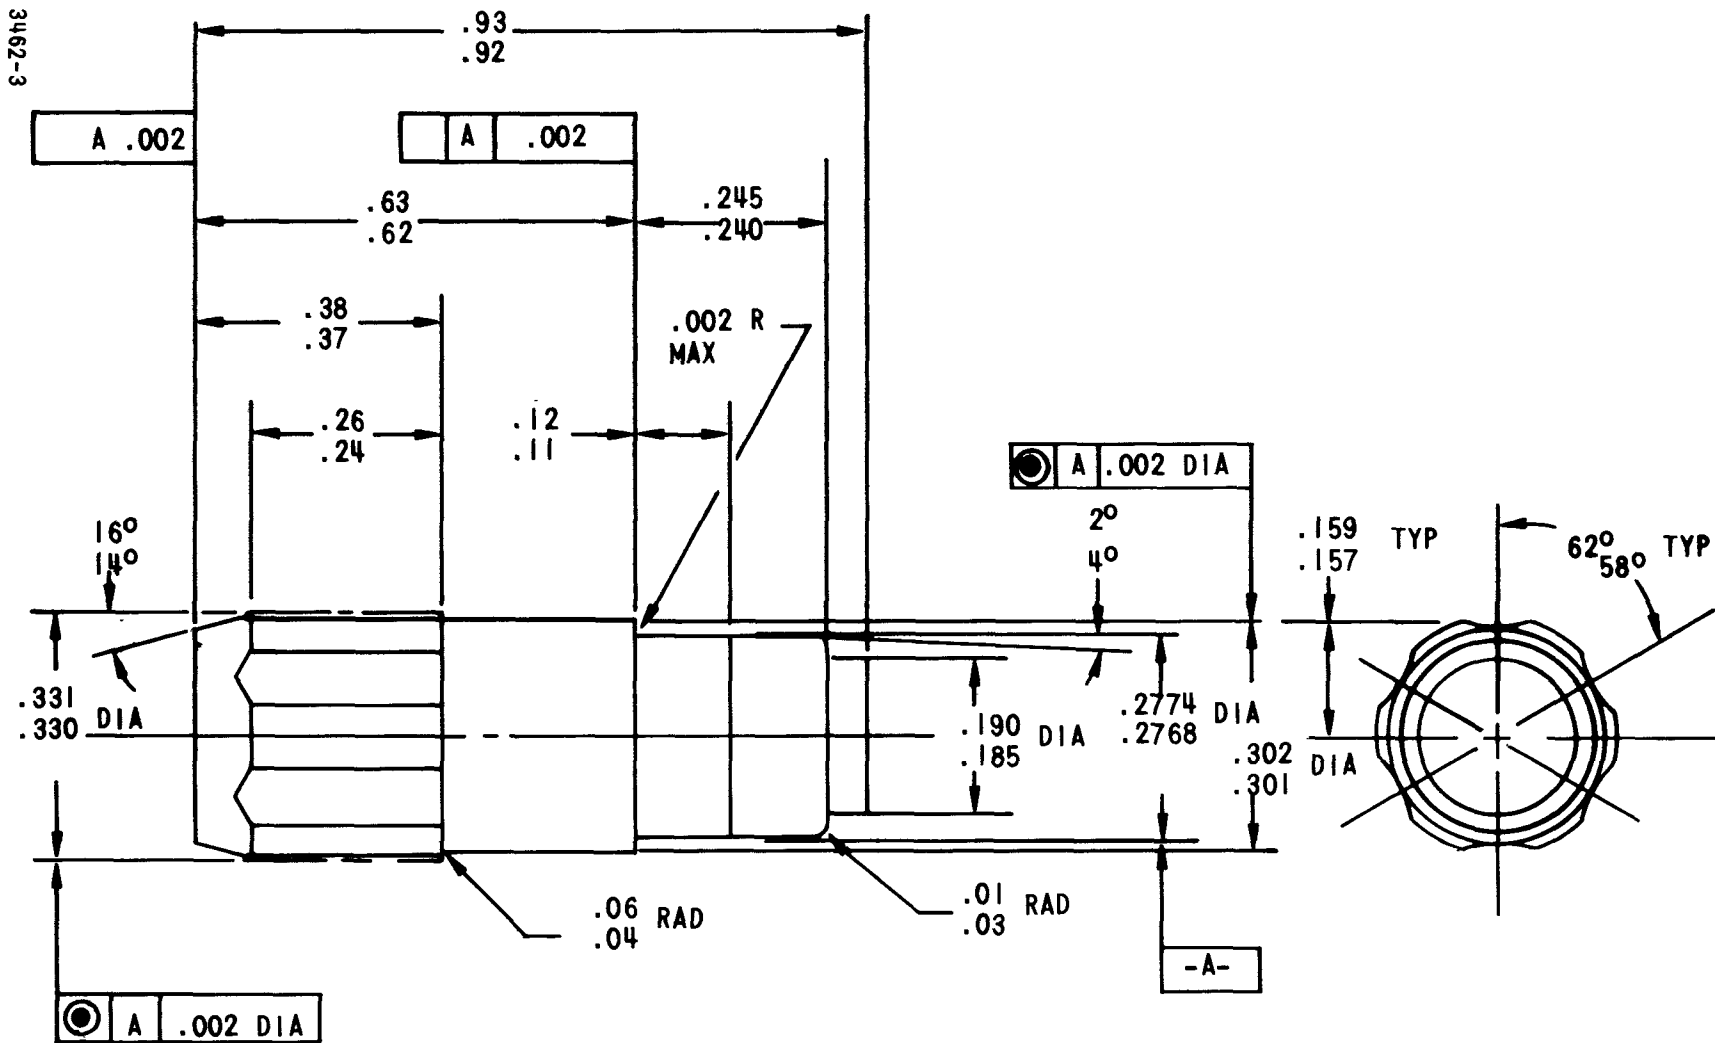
Top End Plug Used for EBR-II Type Irradiation Fuel Rods
